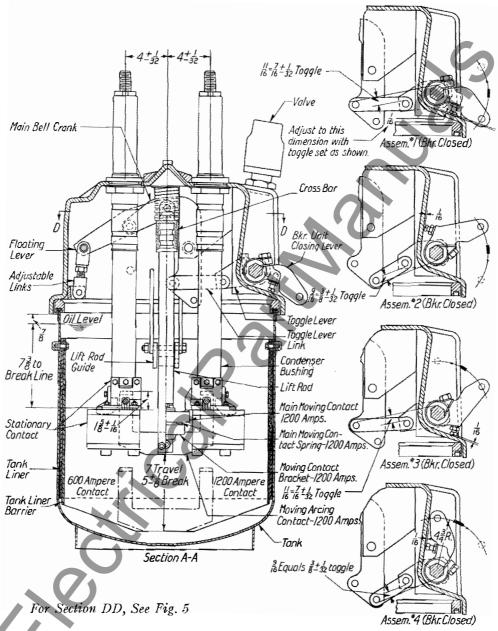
Cross Section of Type B-20-B Oil Circuit-Breaker Showing Various Arrangements of Toggle Lever and Link Assembly
